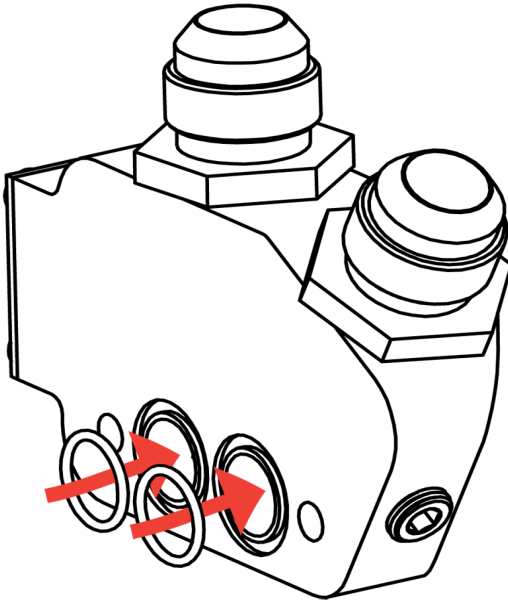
Insert the O-rings into the adapter's O-ring glands
